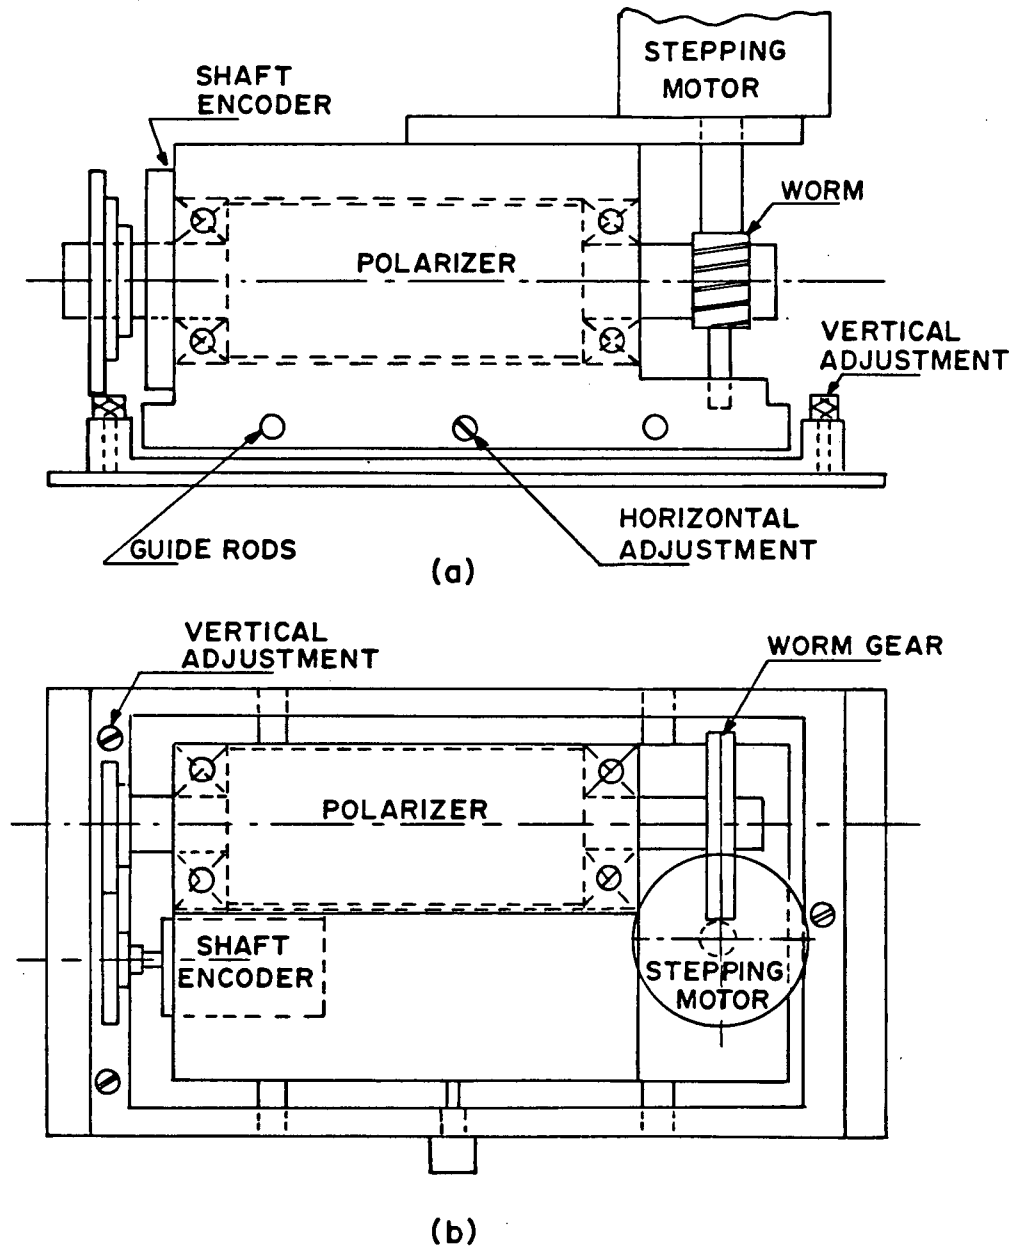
Schematic of polarizer assembly. (a) front view and (b) side view.
